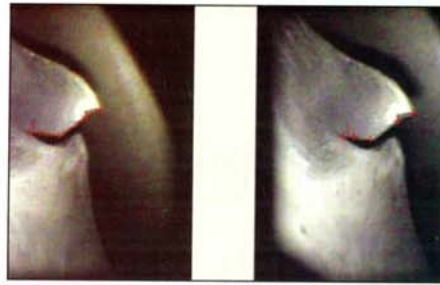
Borescope inspection estimated that the length of the crack on this compressor rotor blade was 0.278 inches
